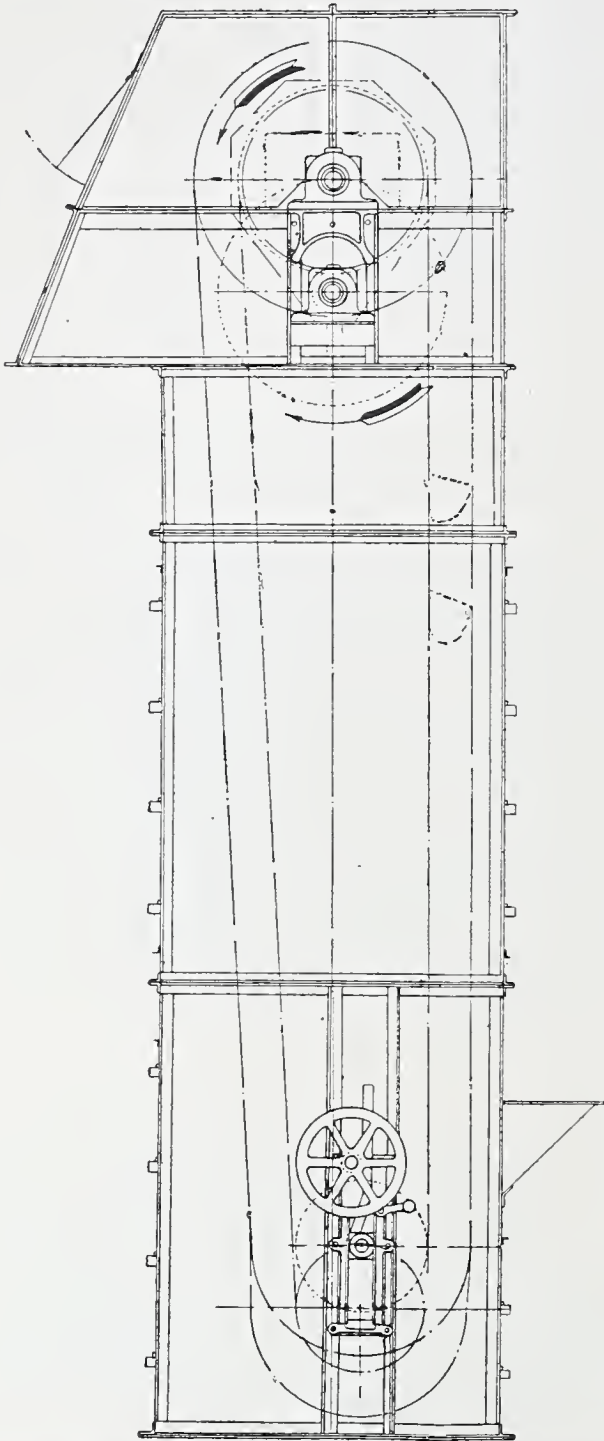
Standard Type of Sturtevant Bucket Elevator. (*The Sturtevant Engineering Co., Ltd.*)
